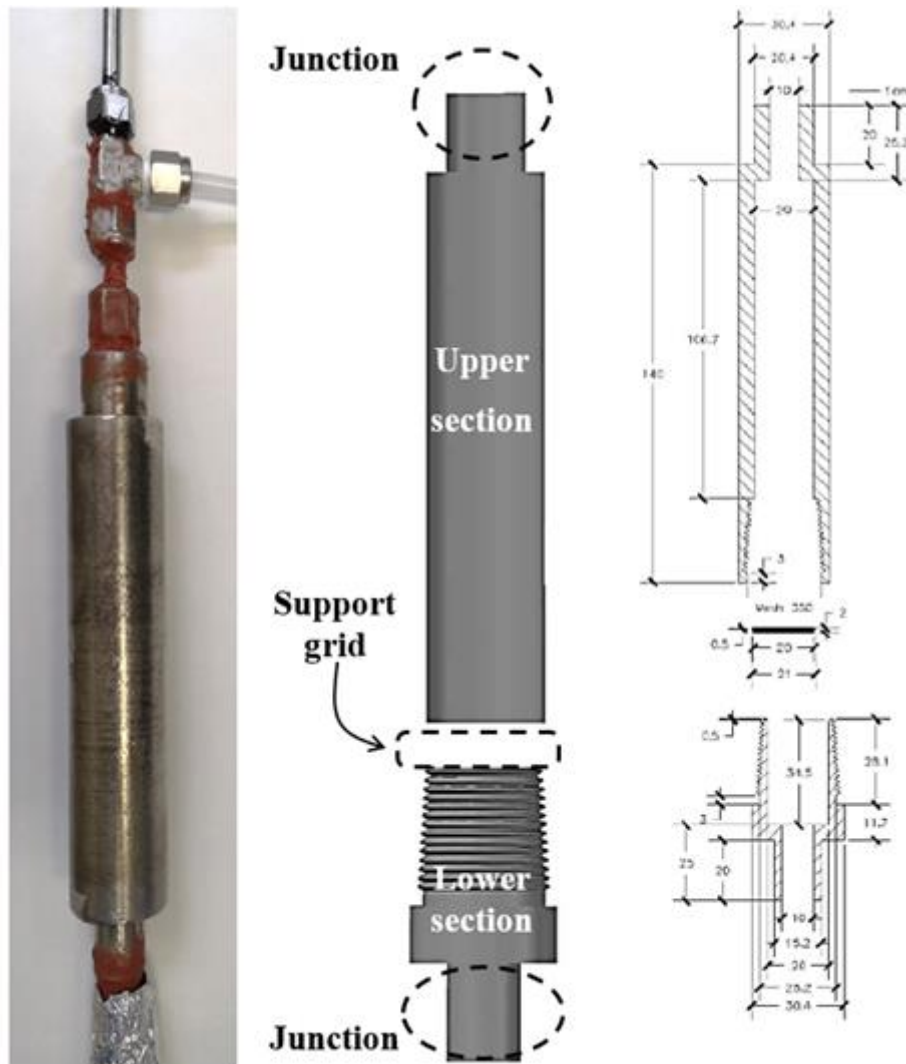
Reactor for the adsorption tests: picture (left) 3D view middle, dimensioned “dwg” drawing (right).
